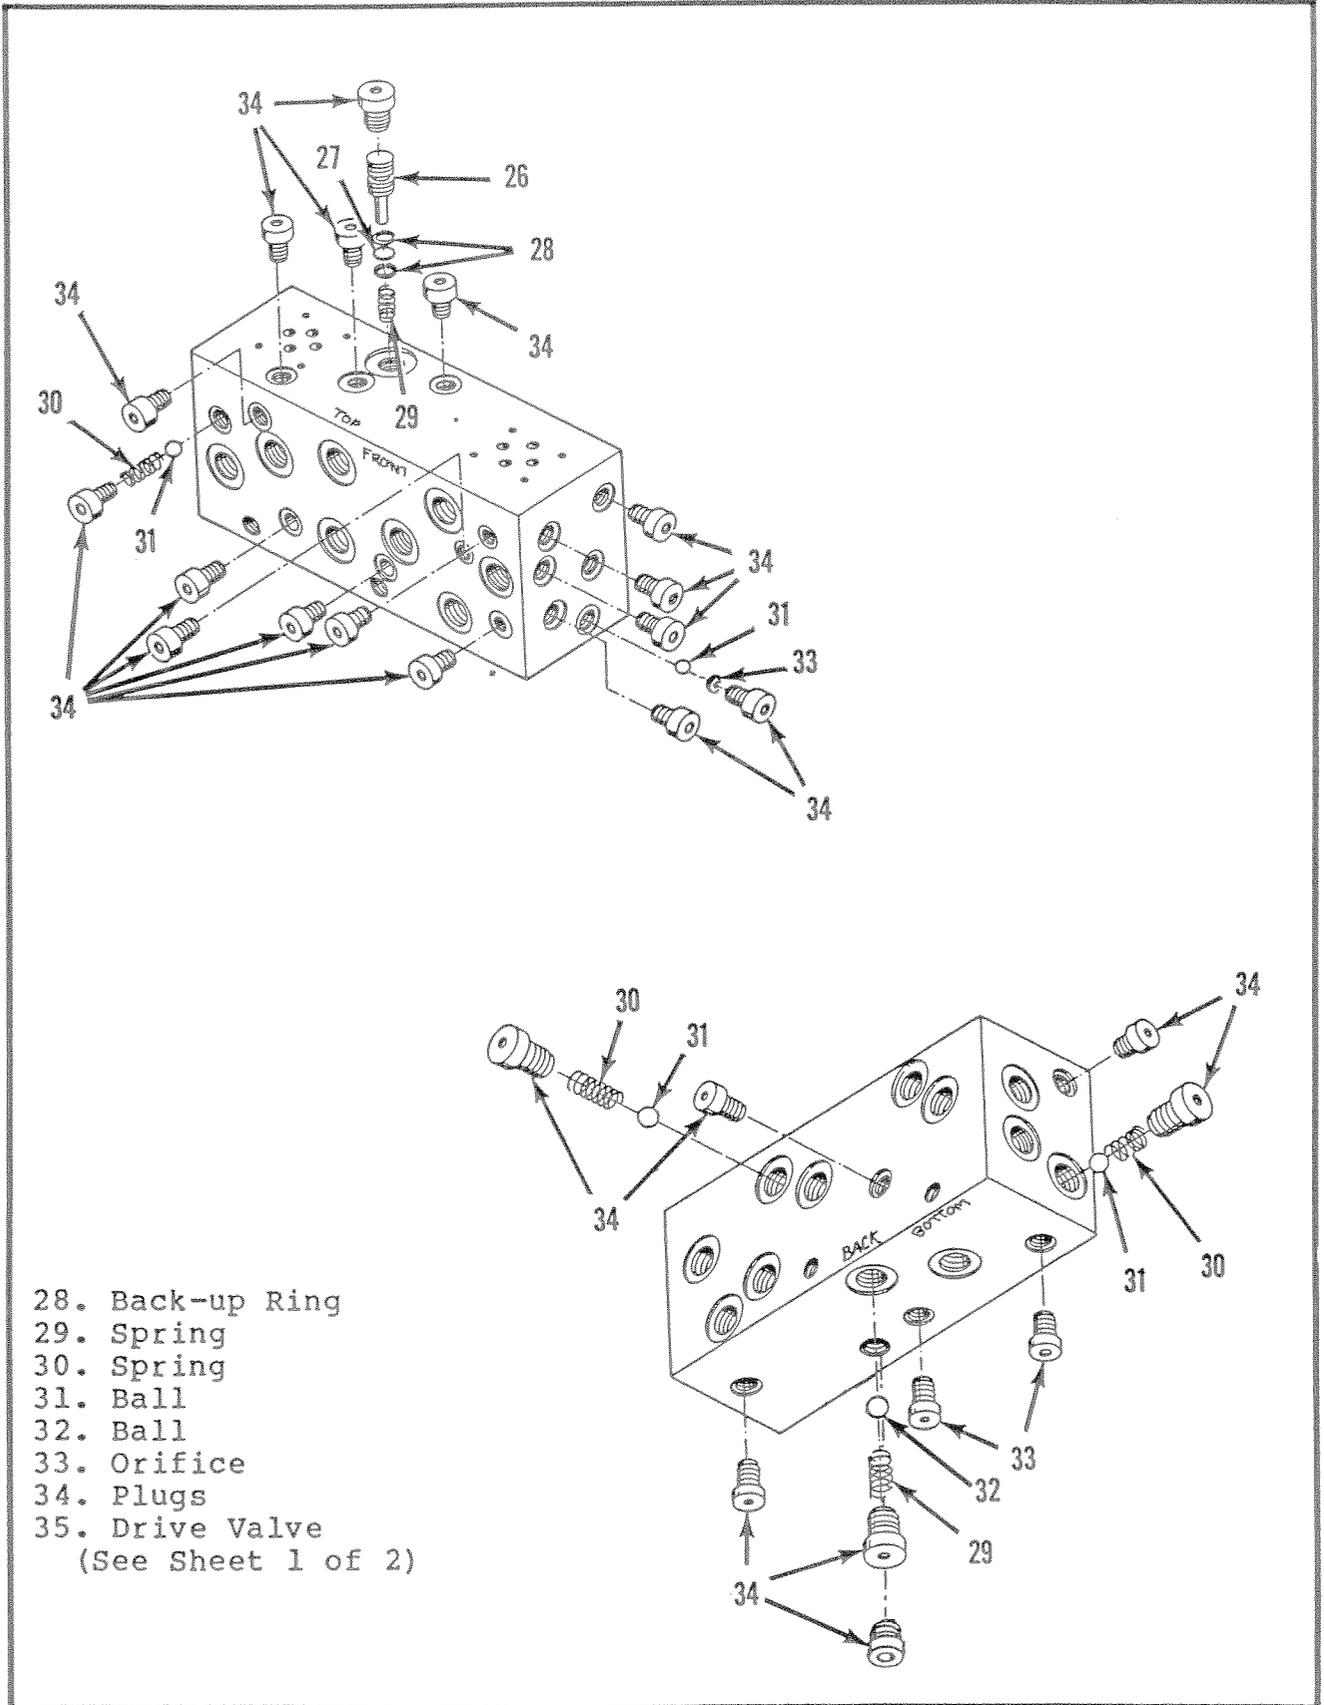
Hydraulic Manifold (Sheet 2 of 2)
